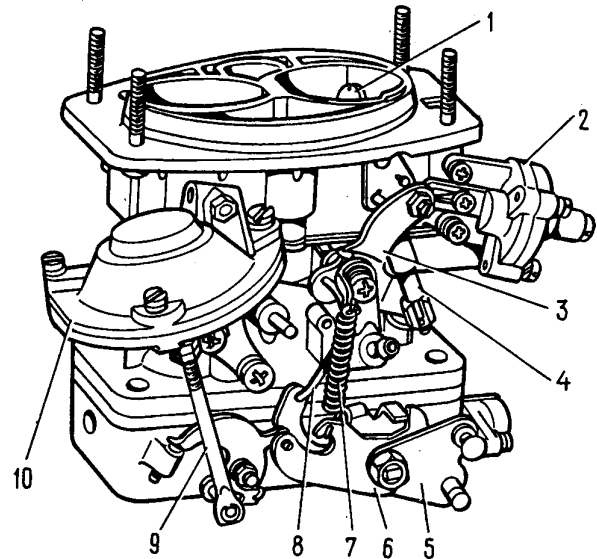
Carburettor 2107-1107010-20 Viewed from Throttle Control Linkage:
